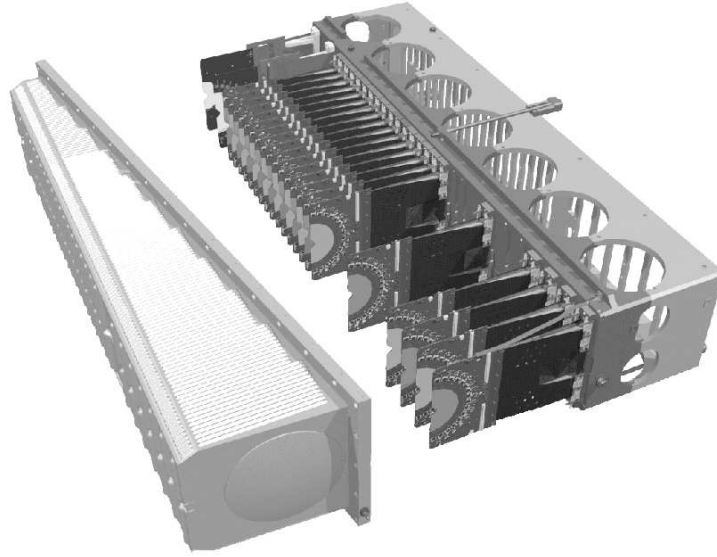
Exploded view of the modules on a module support and the RF-box that surrounds them.
